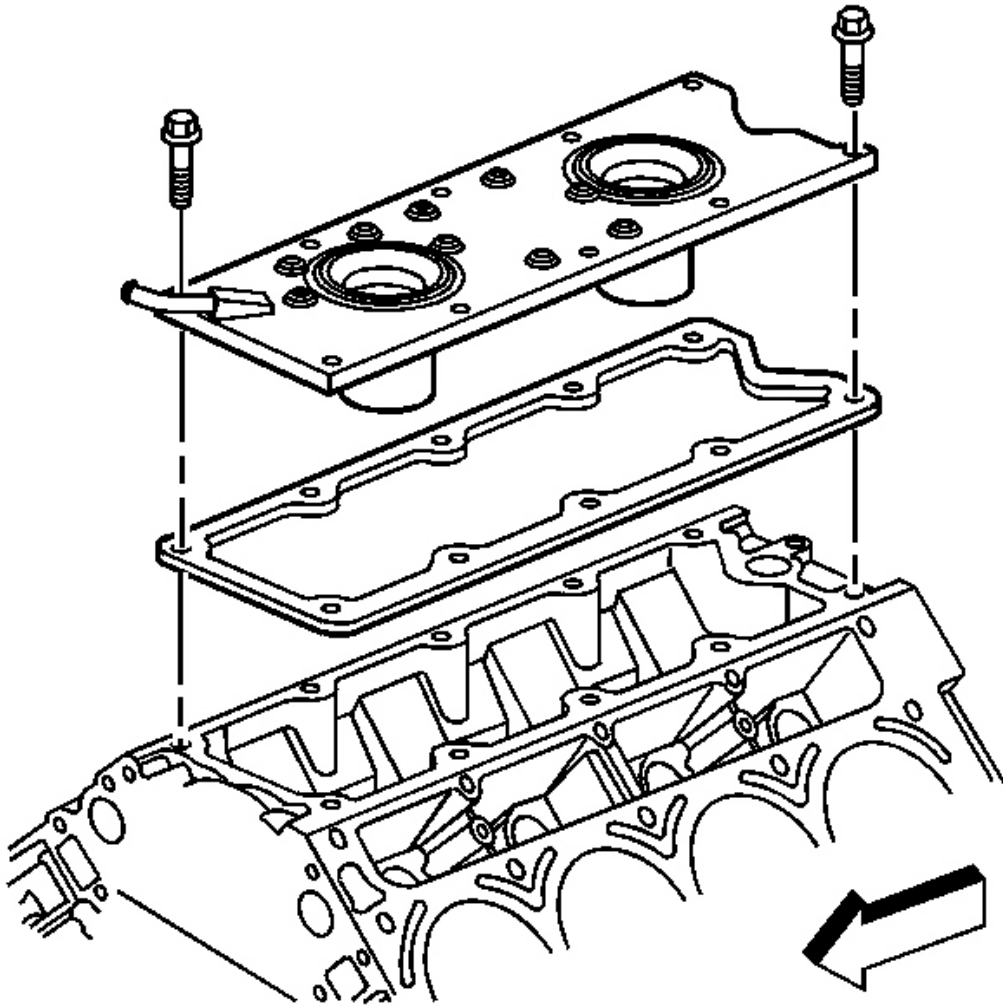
Engine Valley Cover, Gasket, Bolts & LS6 Engine
